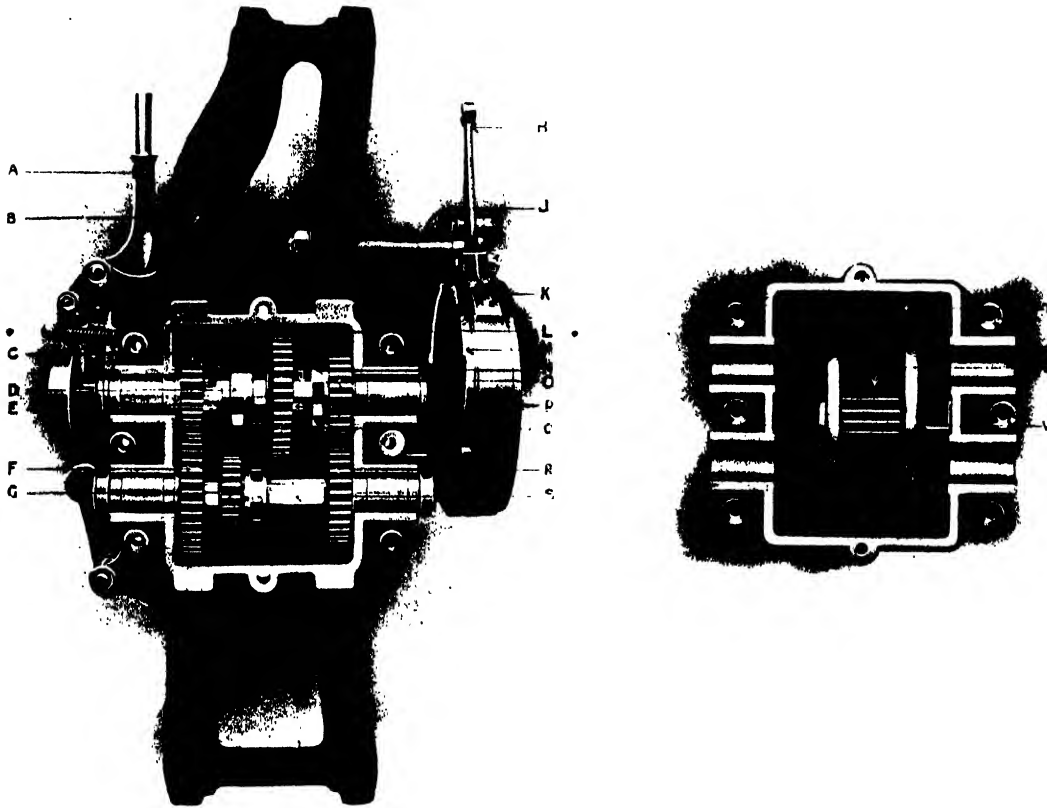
Argyll Three-speed Gear Box, showing Cover removed
